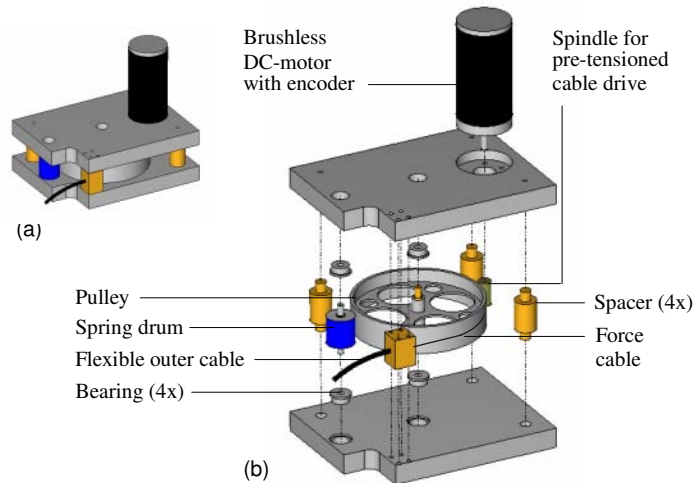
Concept A: (a) actuator module, (b) exploded view of actuator module with its components.
